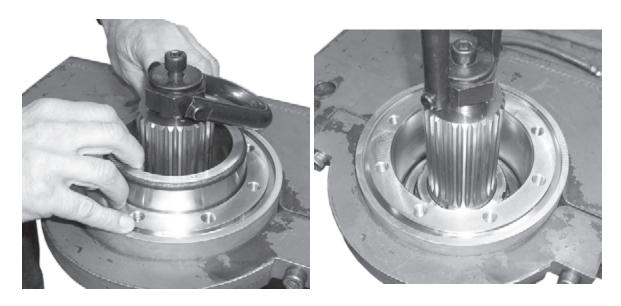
Install the Chilled Front Bearing Cup (left), and Raise the Shaft to Ensure End Play (right)
